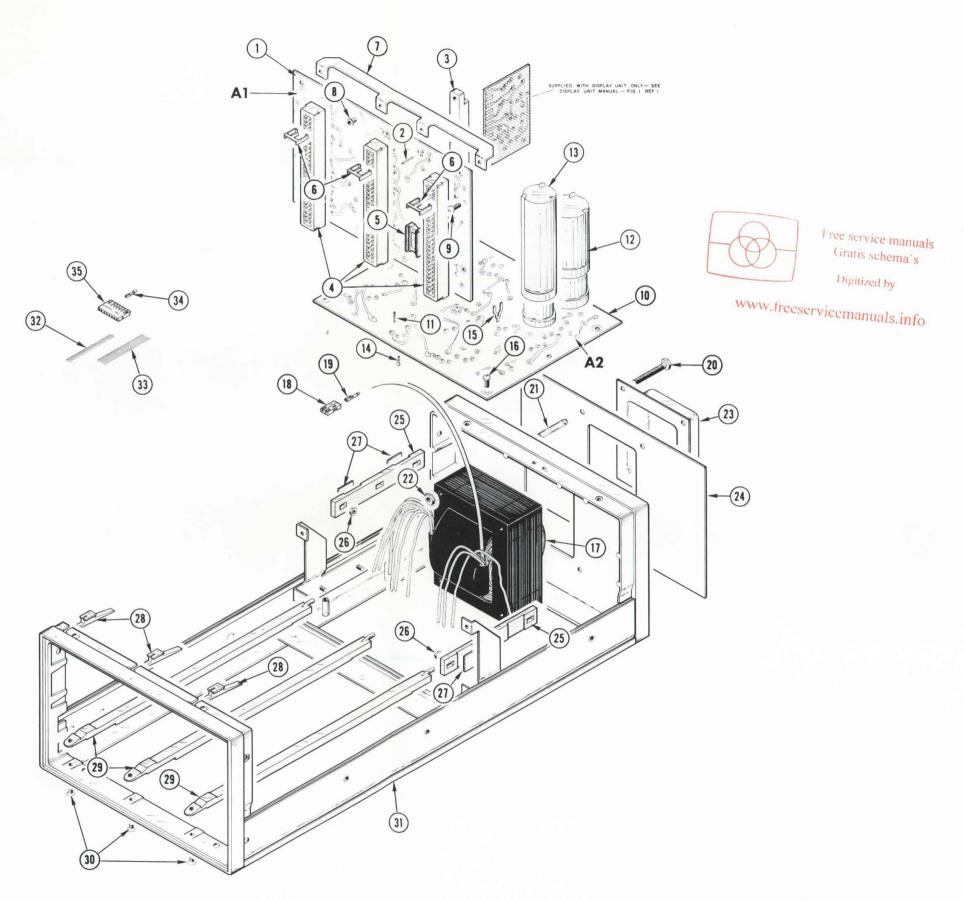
EXPLODED & STANDARD ACCESSORIES (cont)
